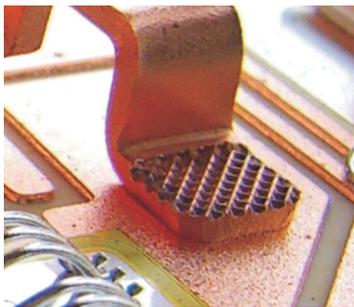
Copper terminal joint to DCB circuit by ultrasonic welding
